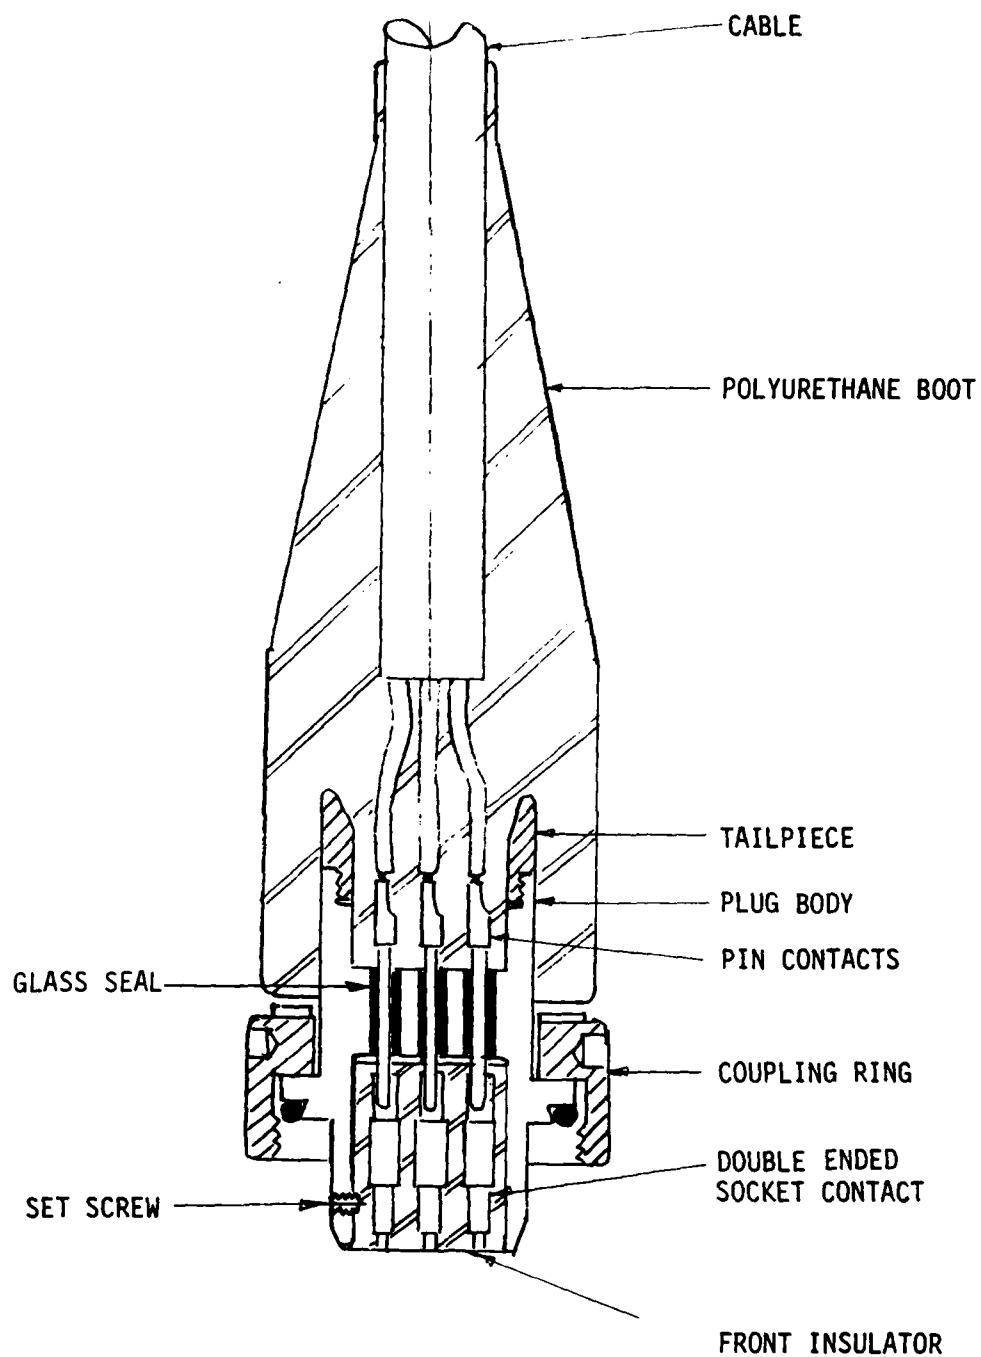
TRIDENT MIL-C-24231 TYPE PLUG ASSEMBLY
